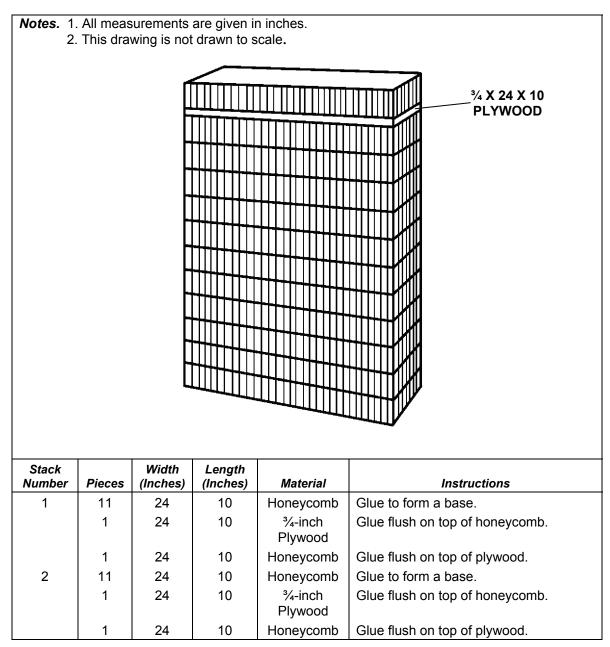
Honeycomb Stacks 1 and 2 Built
